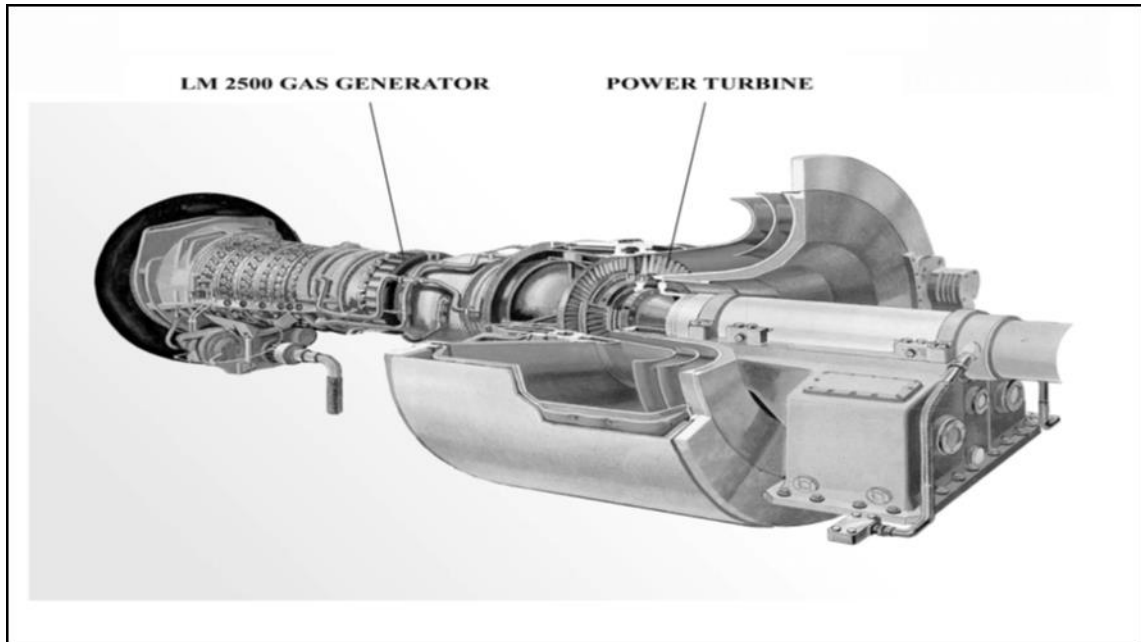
PGT 25 (GG-LM2500+HSPT) assembly [30].
